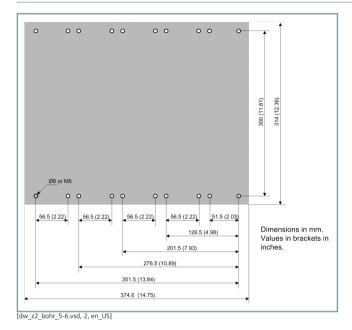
/31 Drilling Pattern of a 5/6 Surface-Mounted Device – 2nd Device Row
